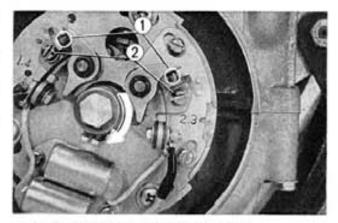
(1) Contact breaker points (2) Contact breaker plate locking screw
